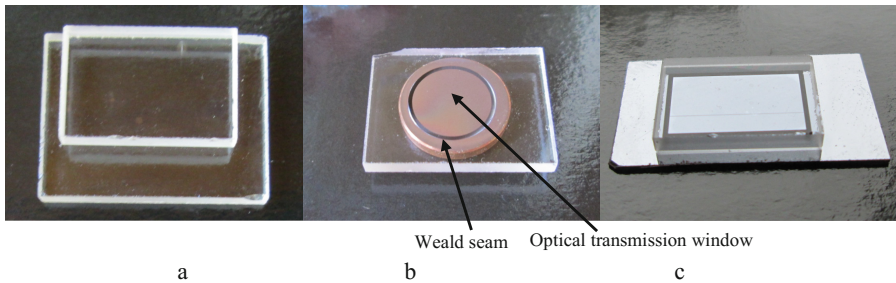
Photographs of femtosecond laser welded optical materials: (a) fused silica-silica (sample 1), (b) fused silica-copper (sample 2), (c) fused silica-silicon (sample 3).
